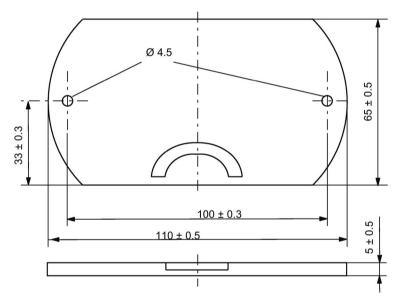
Dimension drawing of fixing pocket 6GT2390-0AA00
